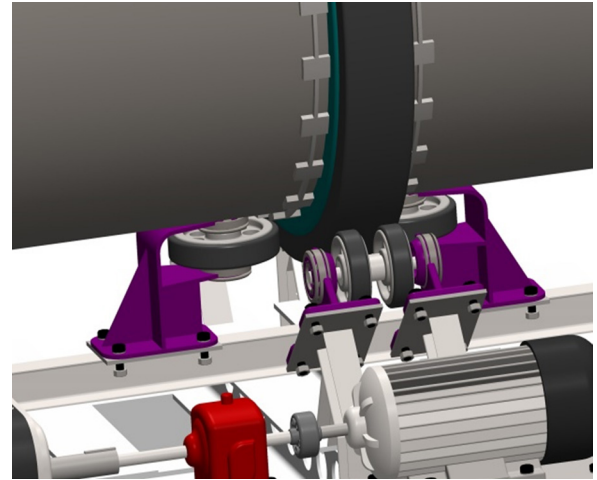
Drum and roller assembly support frame illustration and assembly drawing
